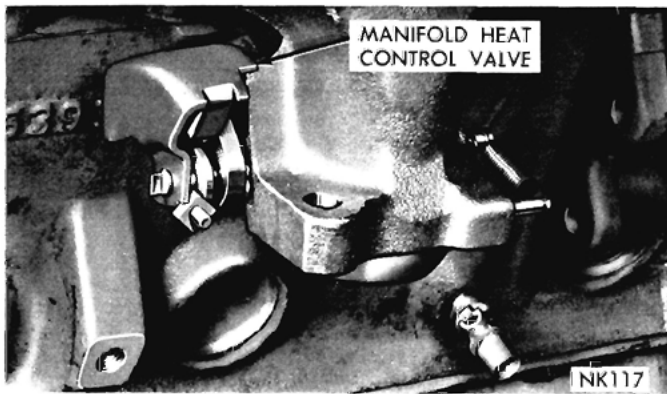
Manifold Heat Control Valve (273 Cu. In. Engines)
